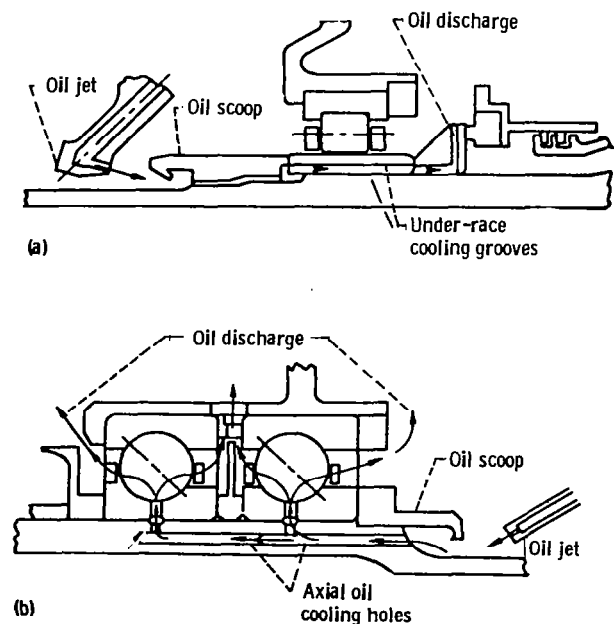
Under-race oiling system for main shaft bearings on turbofan engine. (a) Cylindrical roller bearing. (b) Ball thrust bearing. (From Brown, 1970.)
